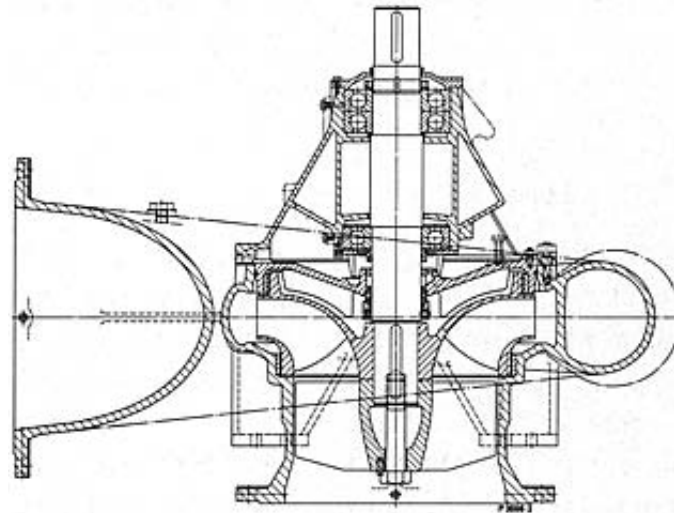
Vertical, radially split casing, double suction volute casing pump with radial impeller
